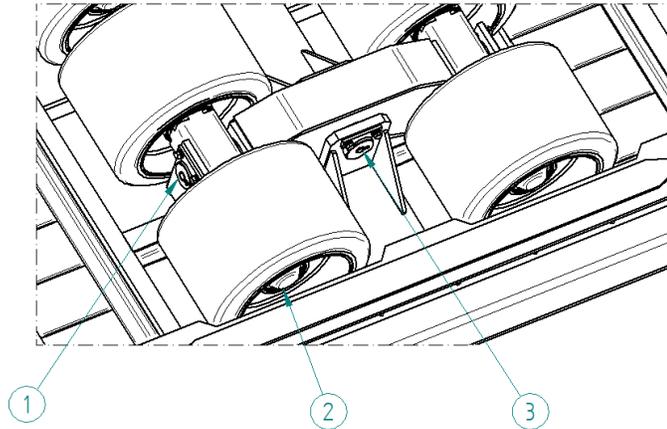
Greasing points in Roll Trailer: 1) Rocker arm bolts; 2) Wheel hubs; 3) Axles bolts;
